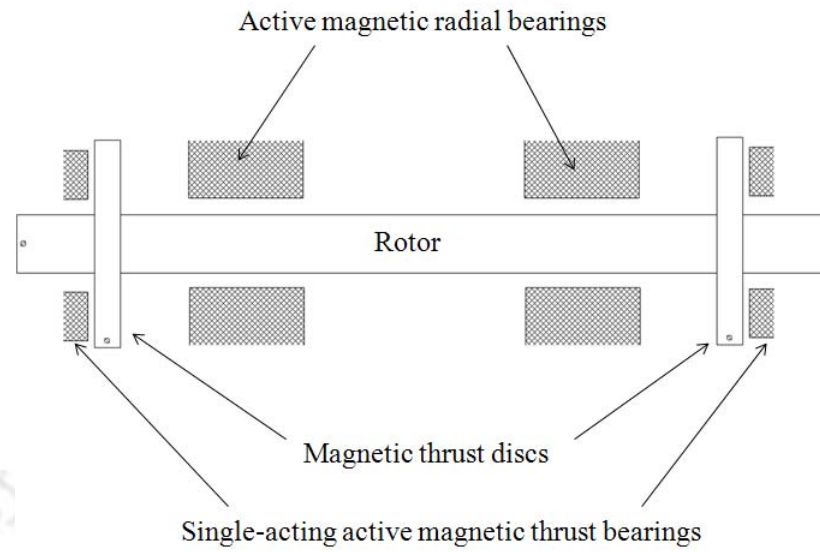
A rotor AMB system with two radial and two single acting thrust magnetic bearings
